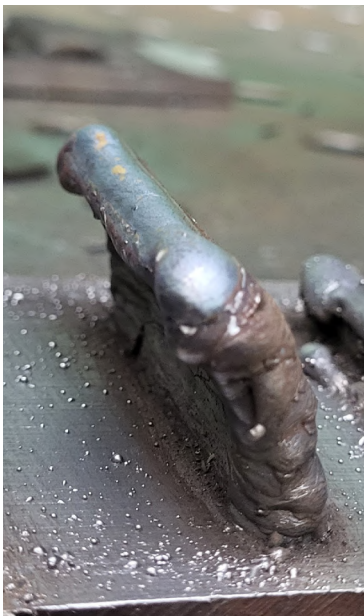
Overflow of the weld pool in layer 12
